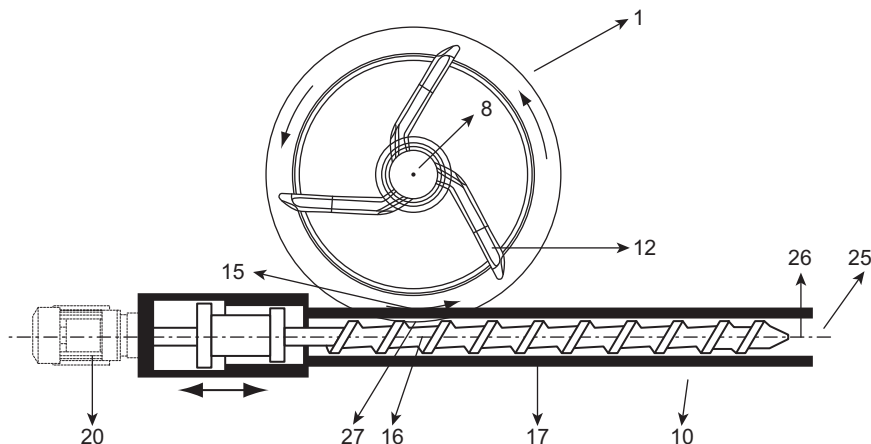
Device comprising a reactor or cutter-compactor (1) and a worm-gear injection molding device (10).
